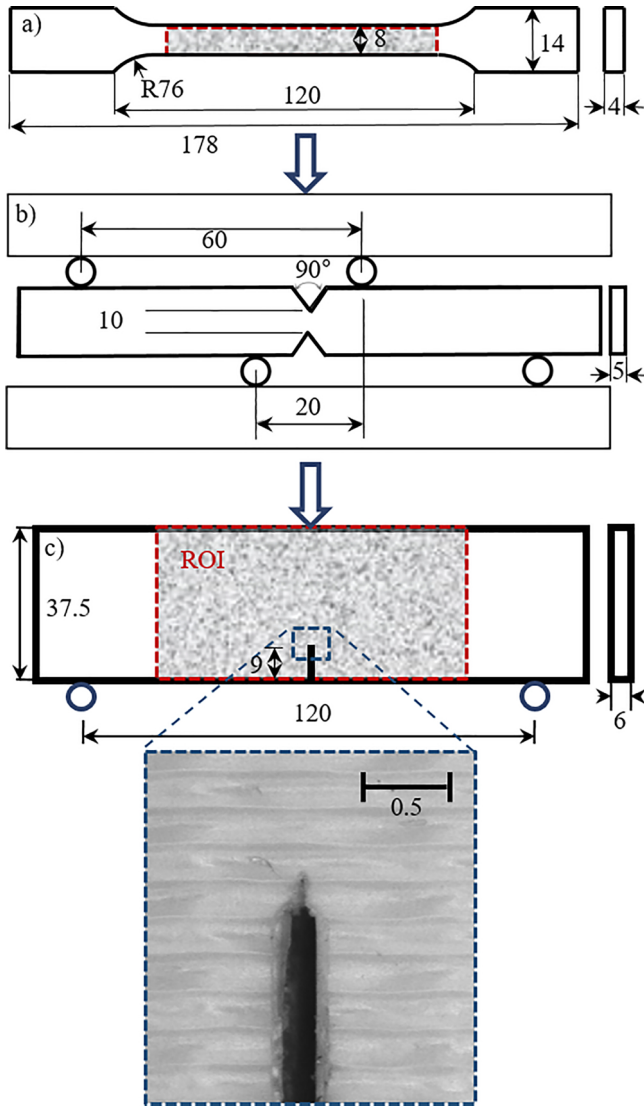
(a) Tension specimen geometry. (b) Iosipescu shear tests specimen geometry and loading configuration. (c) Quasi-static fracture specimen loading and geometry with an inset of the crack tip sharpened by a razor blade. (All dimensions are in mm).
